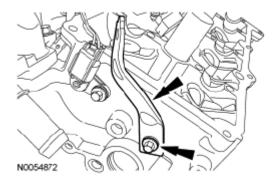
Locating RH CMP Sensor Bolt Courtesy of FORD MOTOR CO.
